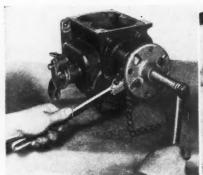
Removing the transmission companion flange using a special flange pulling tool.
